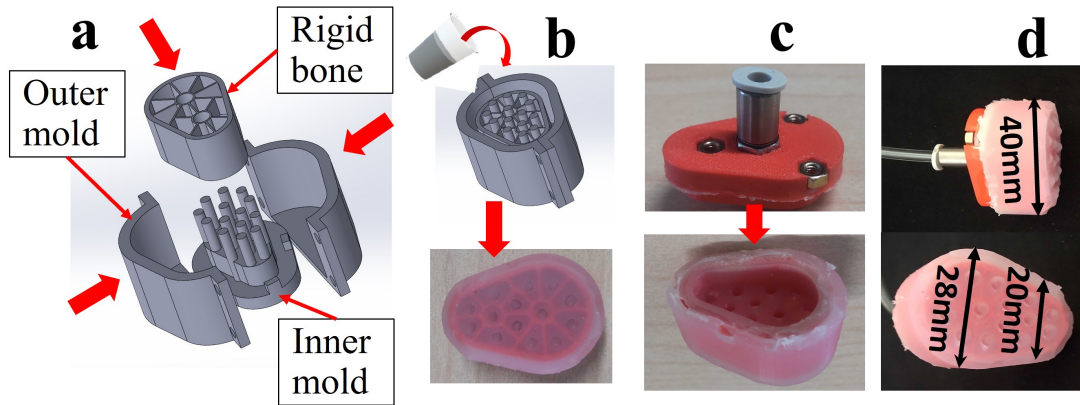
Fabrication procedure: (a) Arrangement of the foot mold. (b) Pouring of silicone material. (c) Finalizing the foot structure. (d) Soft pad with applied pressure and dimensions.
